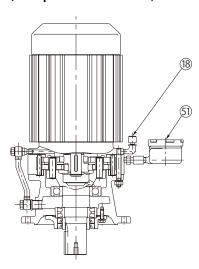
Type CVV (Vertical, Gearmotor), 2 Stage Reduction (Example: Frame size 6135DA)
